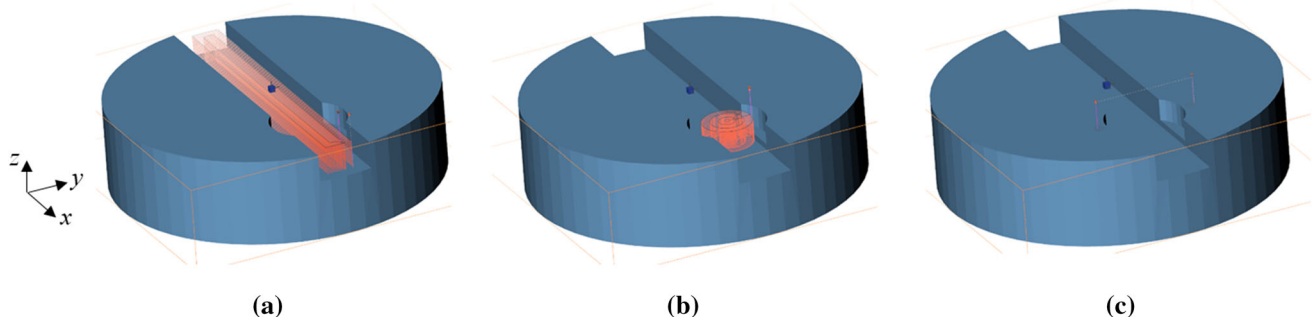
Aluminium support: a rip, b hole for fixing the 420 stainless steel samples, and c small holes to screw the 420 stainless steel samples in position.
